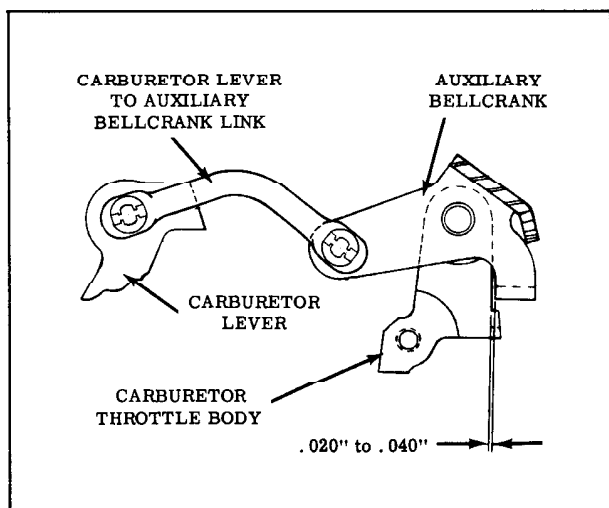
Carburetor Lever to Auxiliary Bellcrank Adjustment (4 Barrel)
